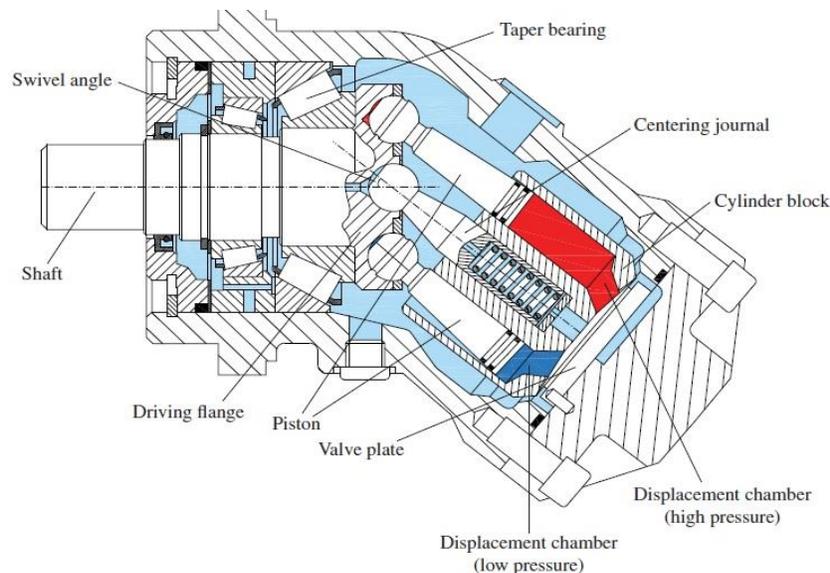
Bent axis-type axial piston machine. Figure source: [11].
